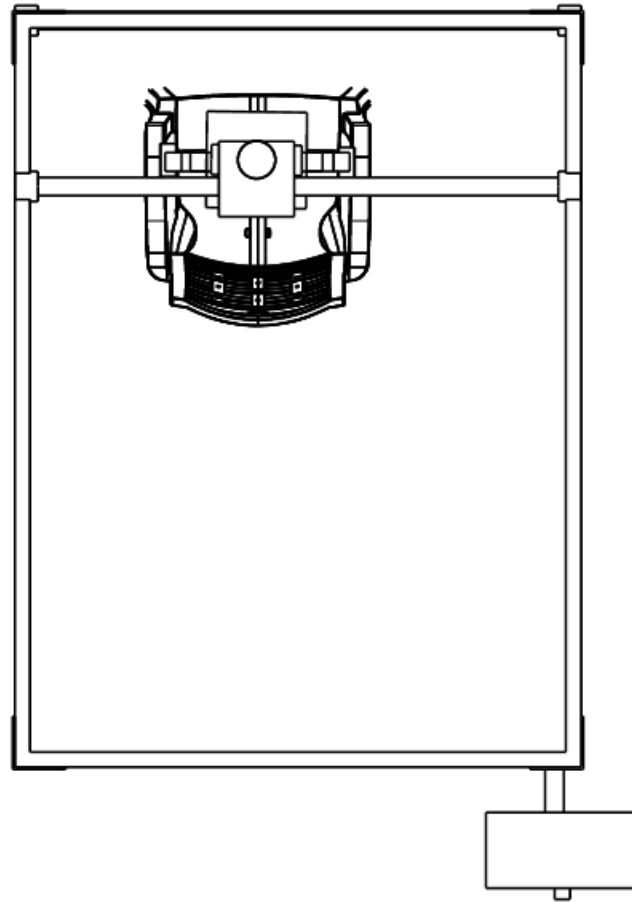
shows the front view of machine control panel, back view of plastic chair and first piston.
